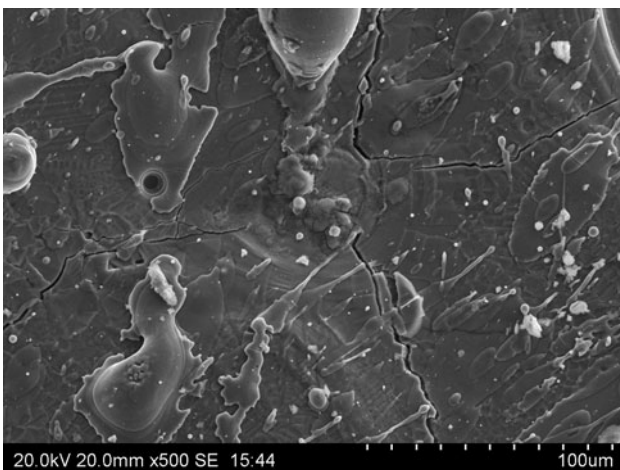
Small cracks and globules on the cut edge of a bad carbon-steel steel sample
